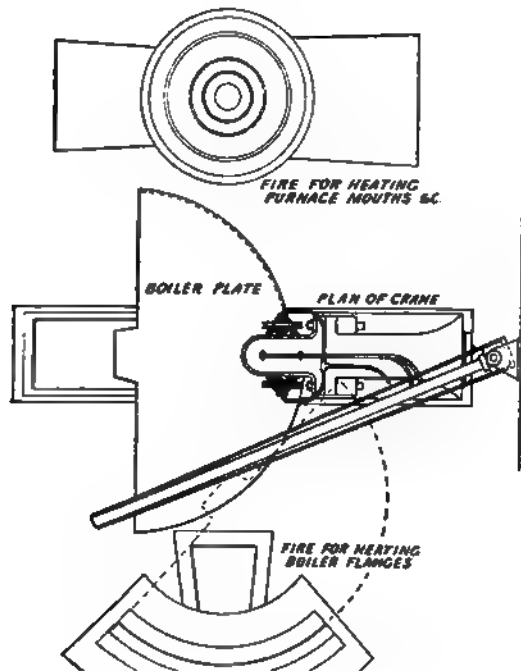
Hydraulic Flanging Machine, with Plan of Crane, and Furnace Arrangements.
